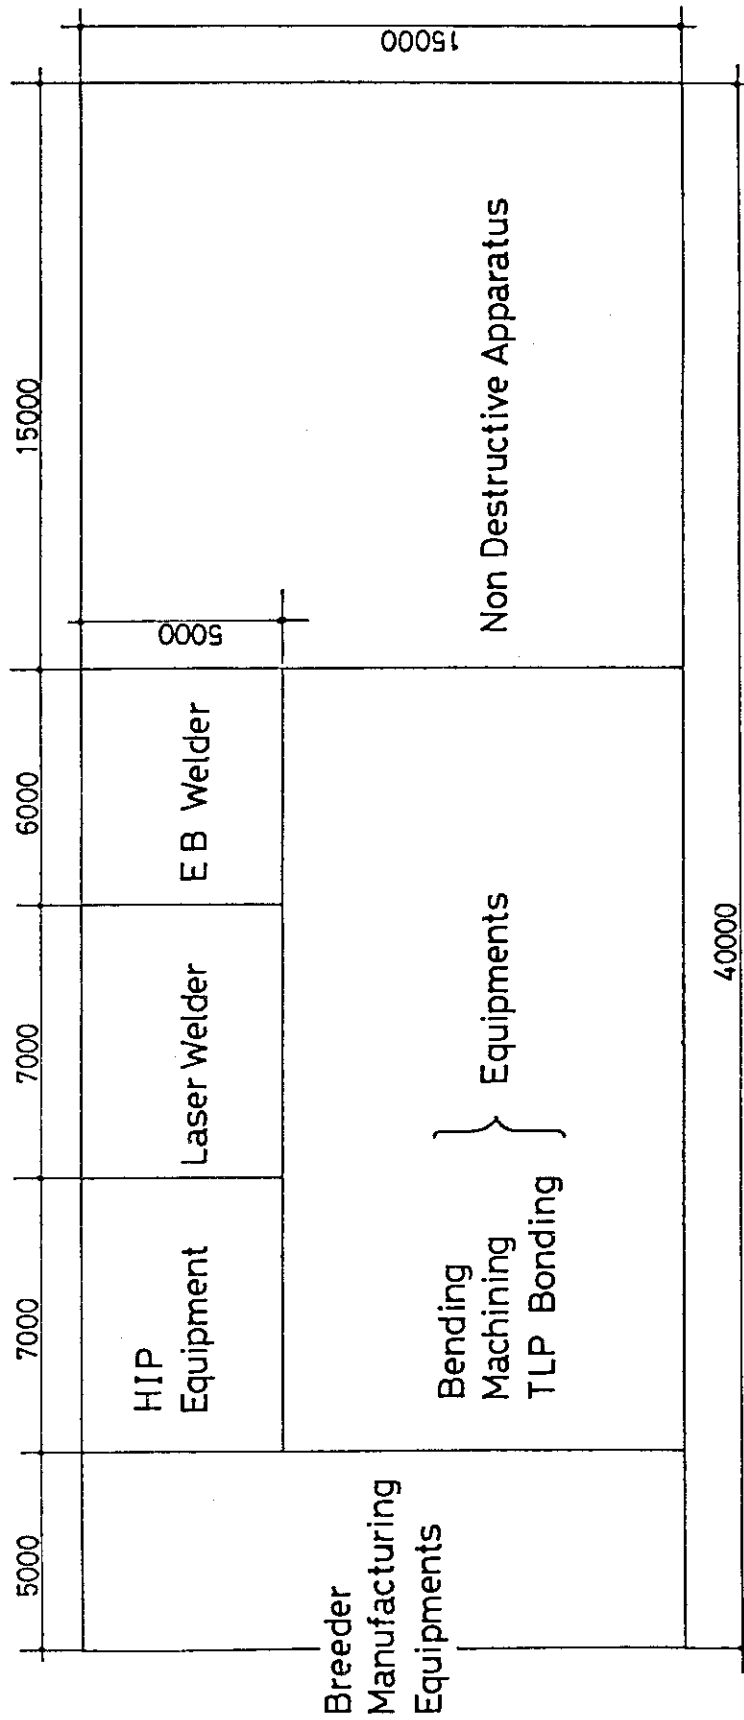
A ground plane of blanket fabrication equipments
